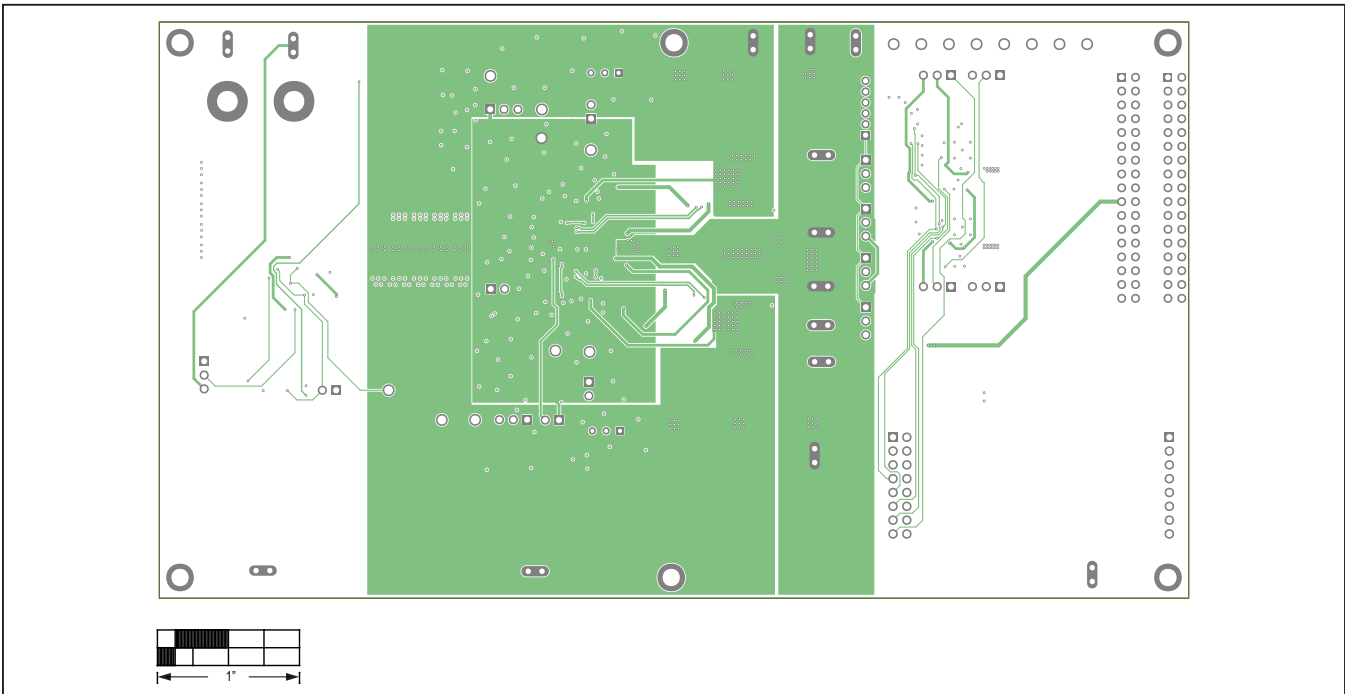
MAX20092 EV Kit PCB Layout—Inner Layer 2
